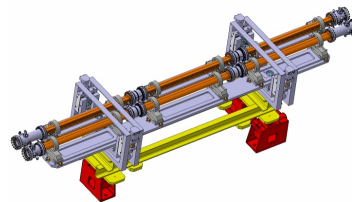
Wire compensator assembly (courtesy of A. Bertarelli). In the simulations we assume four such assemblies in the machine, one per side in IR1 and IR5.
